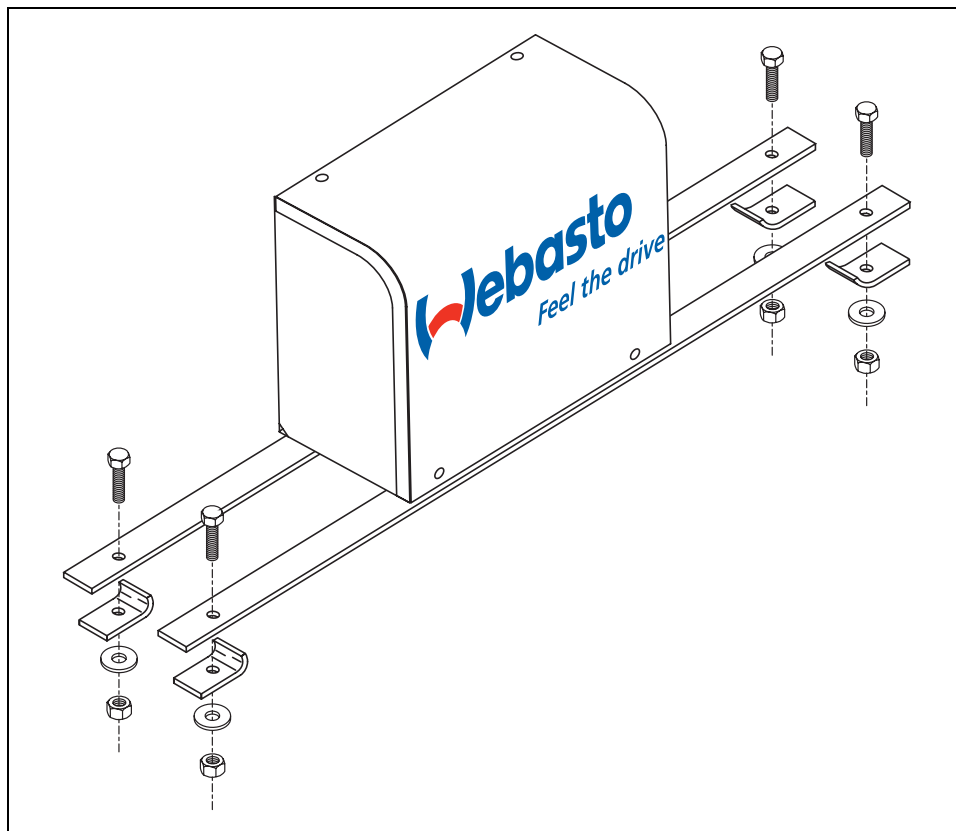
Optional cross-frame mounting bar/clamp kit P/N 600055 (Also see Figure 1)
